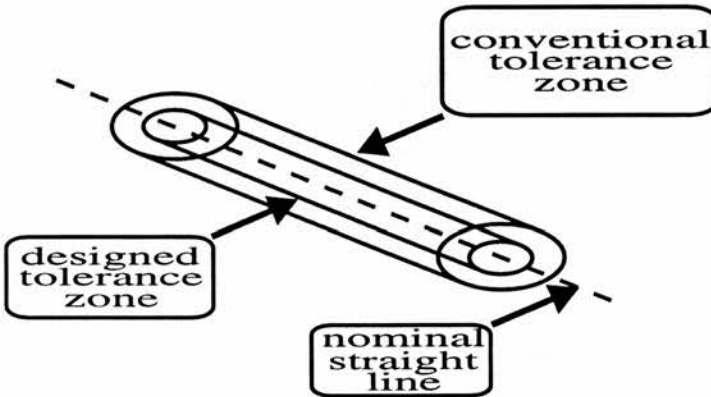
Conventional tolerance zone and designed tolerance zone when the geometric element being offset is a straight line.
